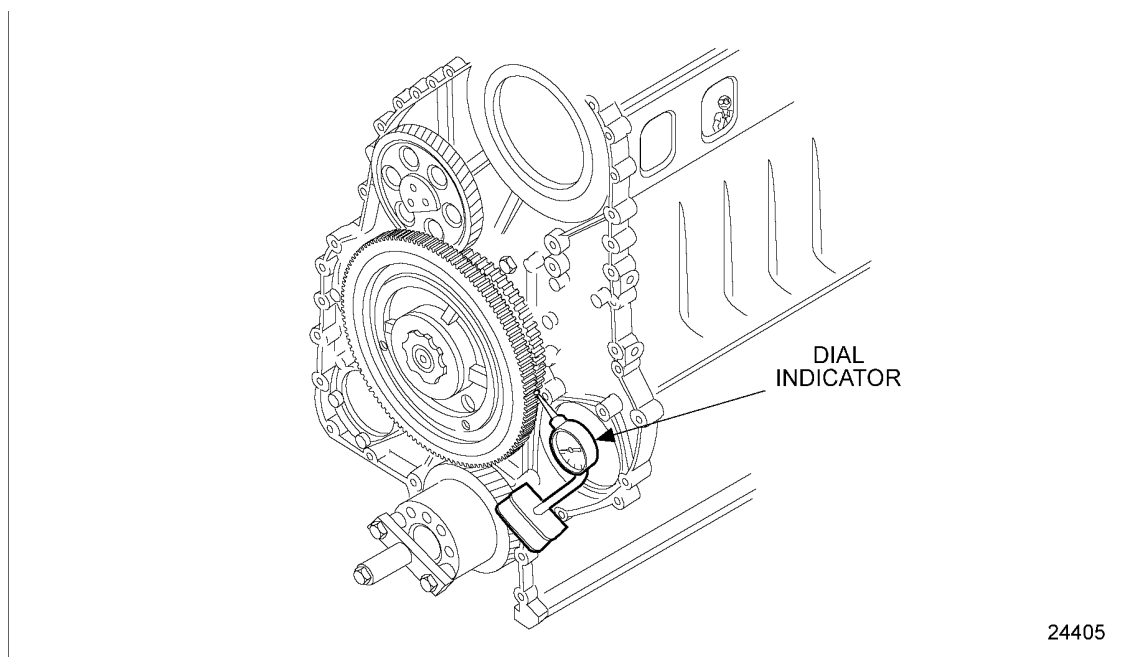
Crankshaft Timing Gear-to-Bull Gear Lash Measurement
